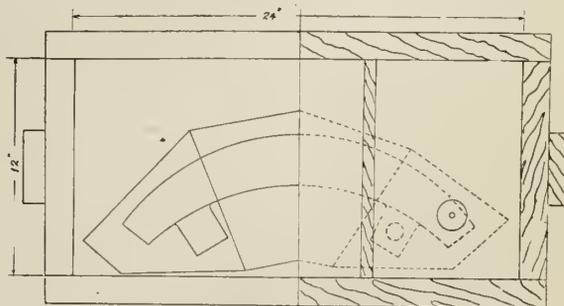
PLAN VIEW OF MOULD SHOWING SLABS OF CORE.
